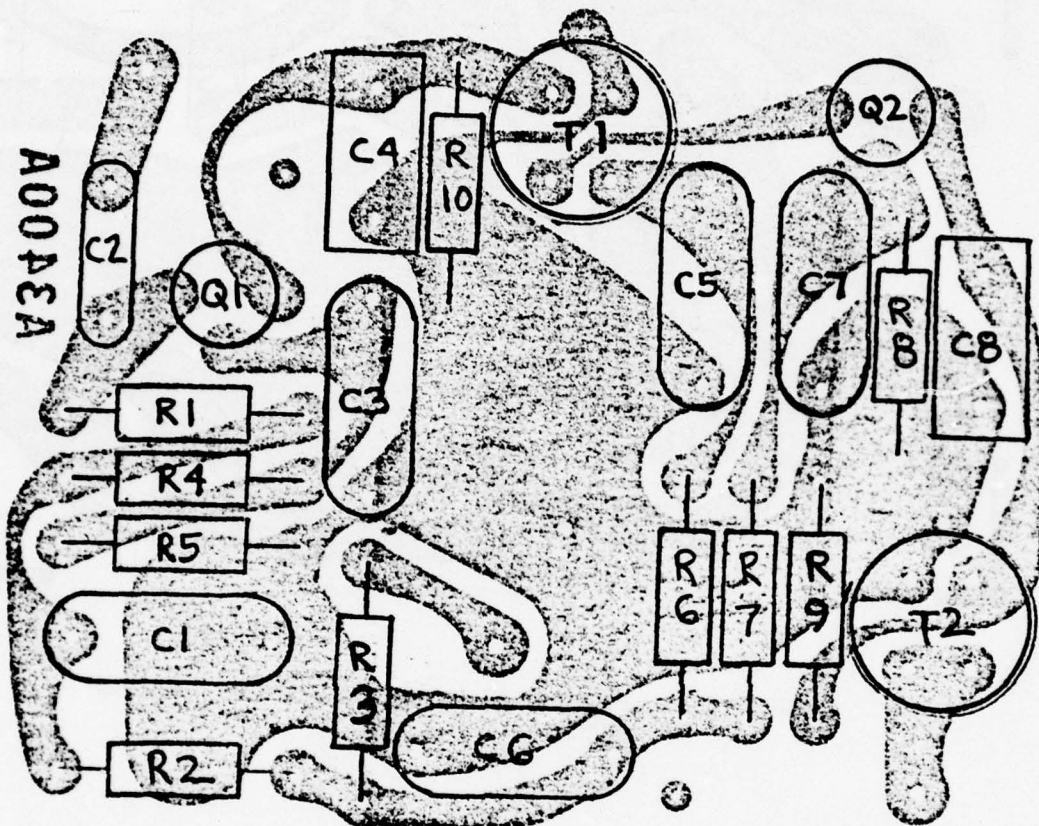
P.C. BOARD LAYOUT FOR THE A3400A CRS FIRST AND SECOND IF AMPLIFIER ASSEMBLY
